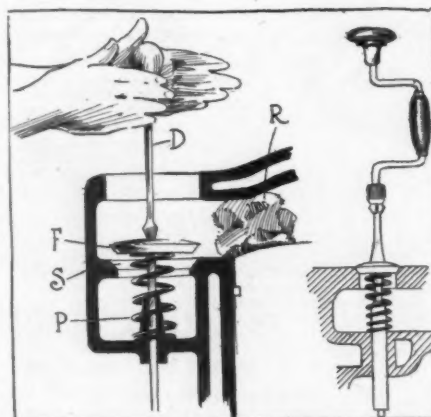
SCREWDRIVER USED FOR GRINDING VALVES. TO THE RIGHT ANOTHER METHOD USING BRACE
